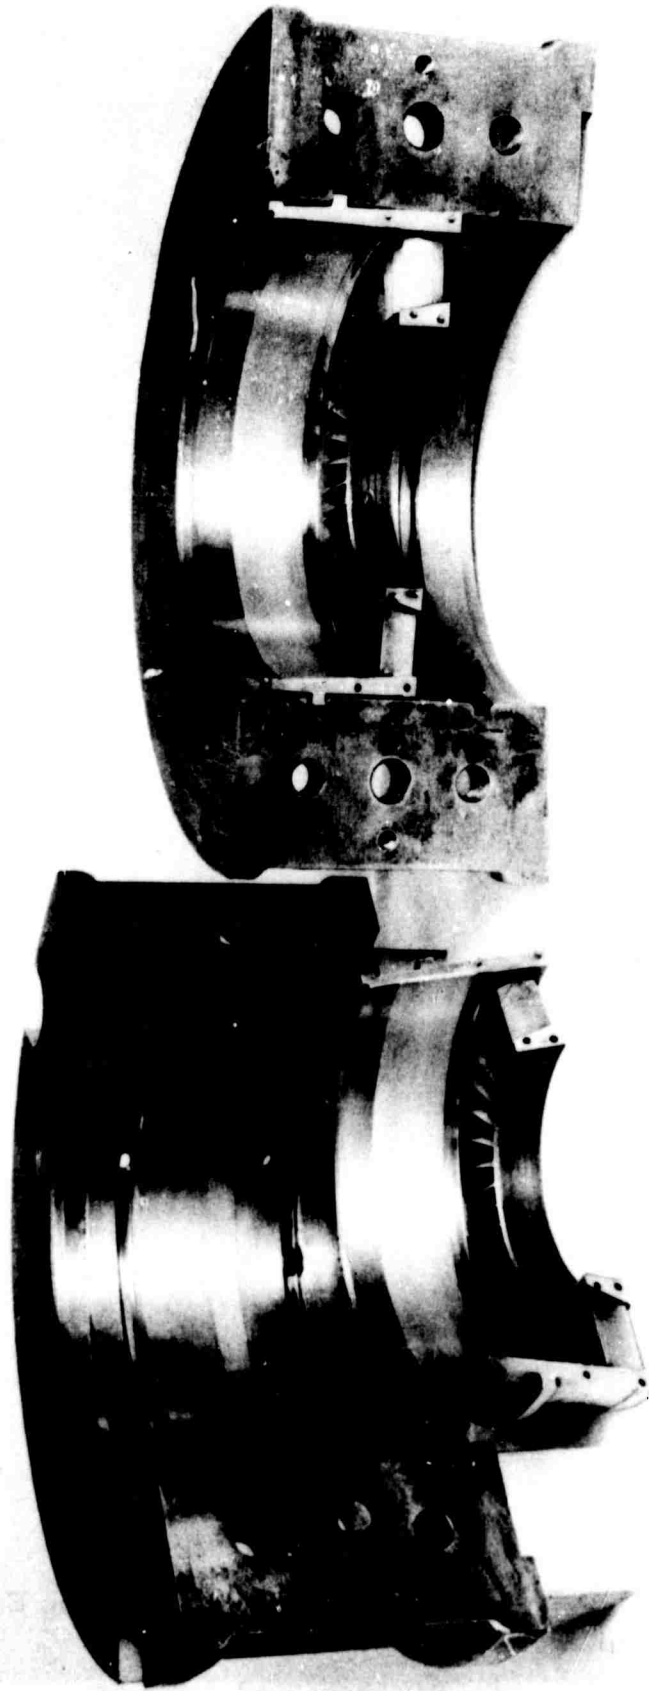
Redesigned First-Stage Stator and Compressor Housings.
